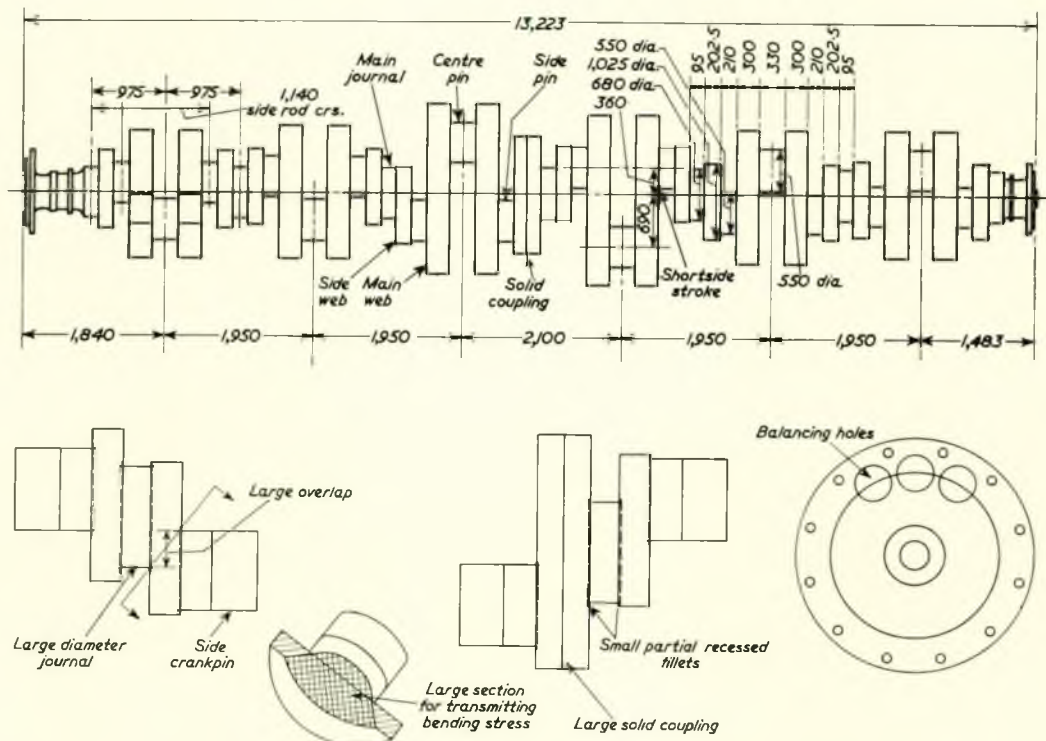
Crankshaft of six-cylinder 670 × 2,100 turbocharged engine
